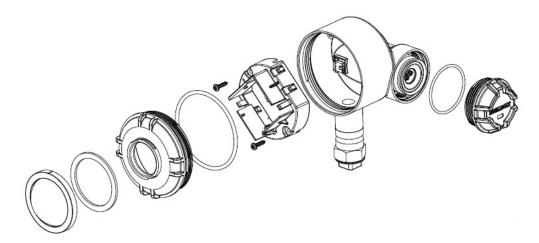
EXPLODED VIEW OF PRODUCT ASSEMBLY
